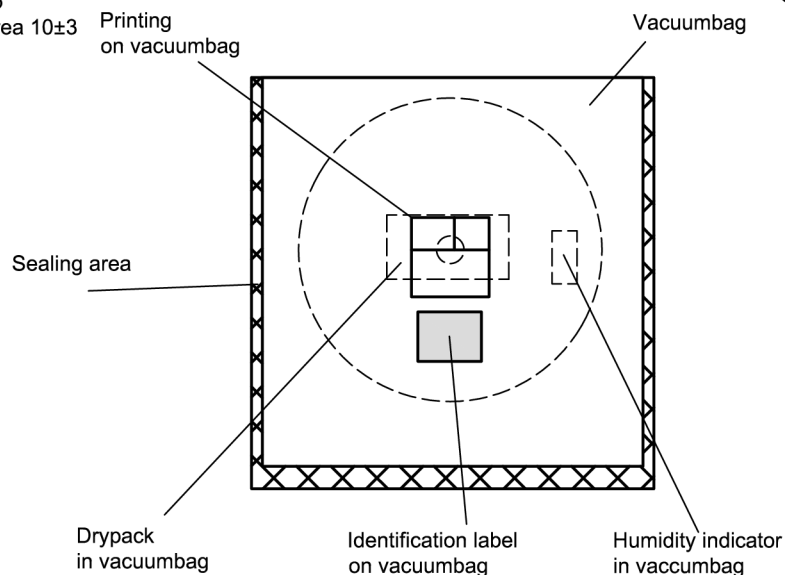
Drawing of moisture barrier bag (MBB) for reel with diameter of 180 mm.
